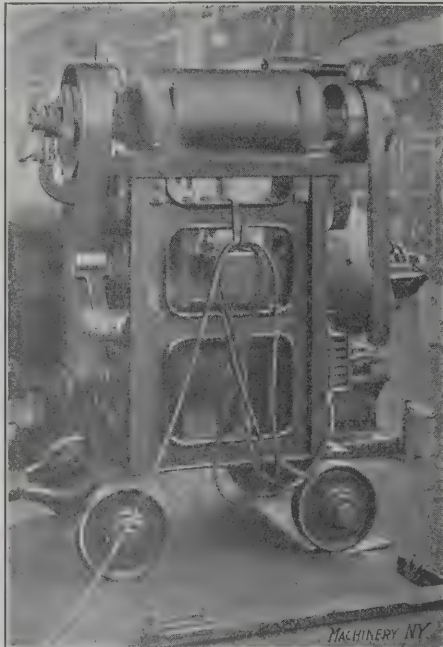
Movable Variable-speed Countershaft for Testing Purposes
